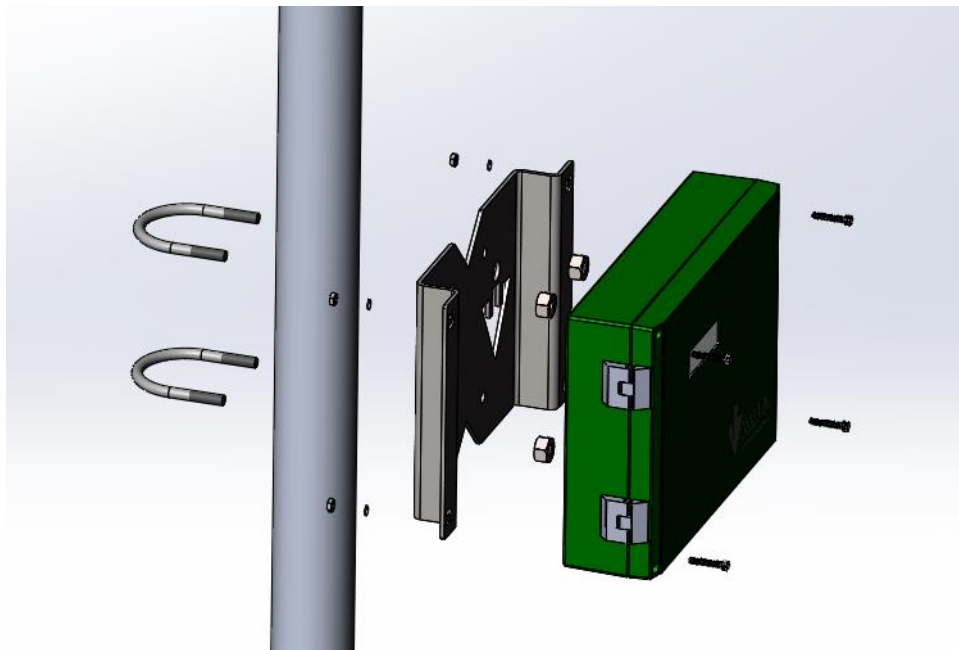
Expl. Angled View of Pipe Mounting Bracket Assembly
